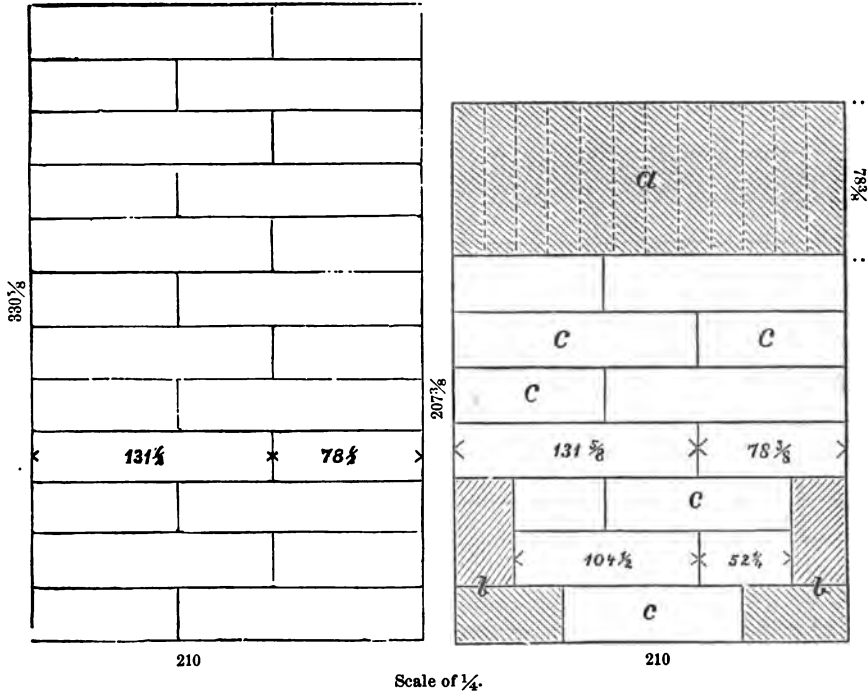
Package of puddled steel bars which is rolled out to a bar of 0.210 m. \times 0.078 m to form the head plate *a* in Fig. 3. In the package, Fig. 3, and in the finished rail, the longer sides of the sections of puddle-bars would occupy a vertical position.
